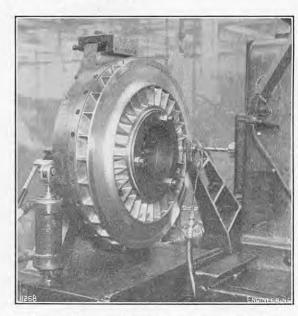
MILLING FRONT POCKET OF IMPELLER.
